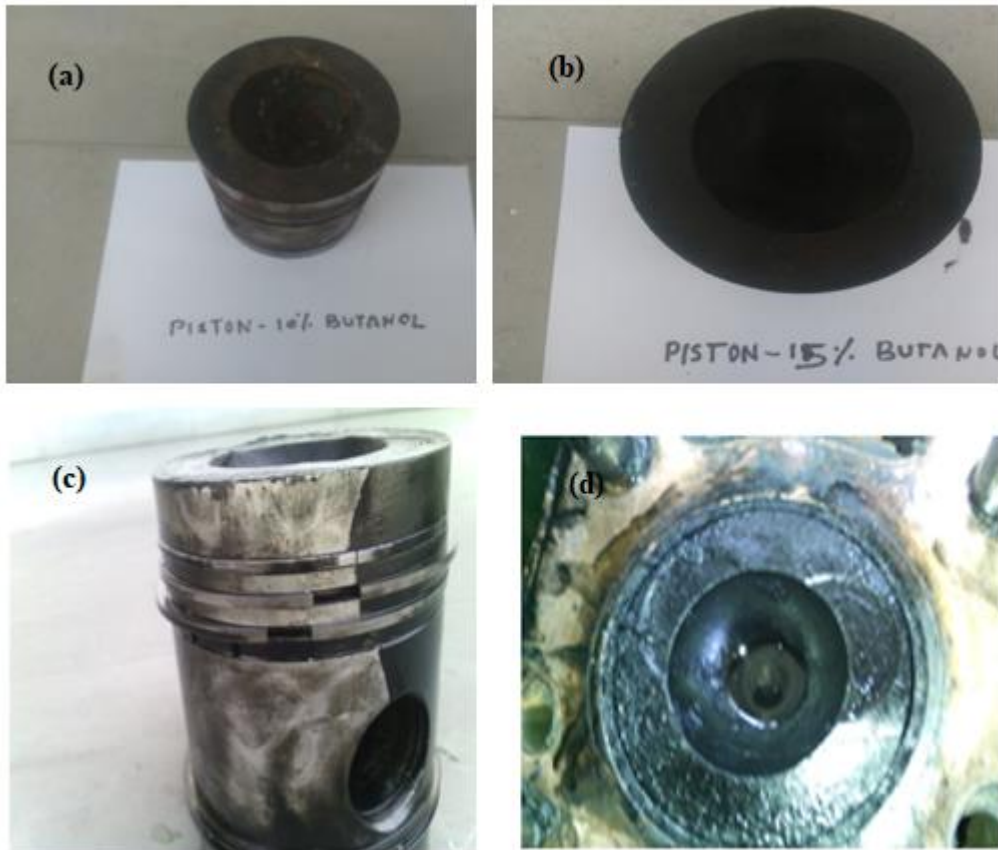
Condition of piston of different engines after 512 hours run (a) Piston of B10 fueled engine (b) Piston of B15 fueled engine (c) Piston of B20 fueled engine (d) Piston of diesel fueled engine
